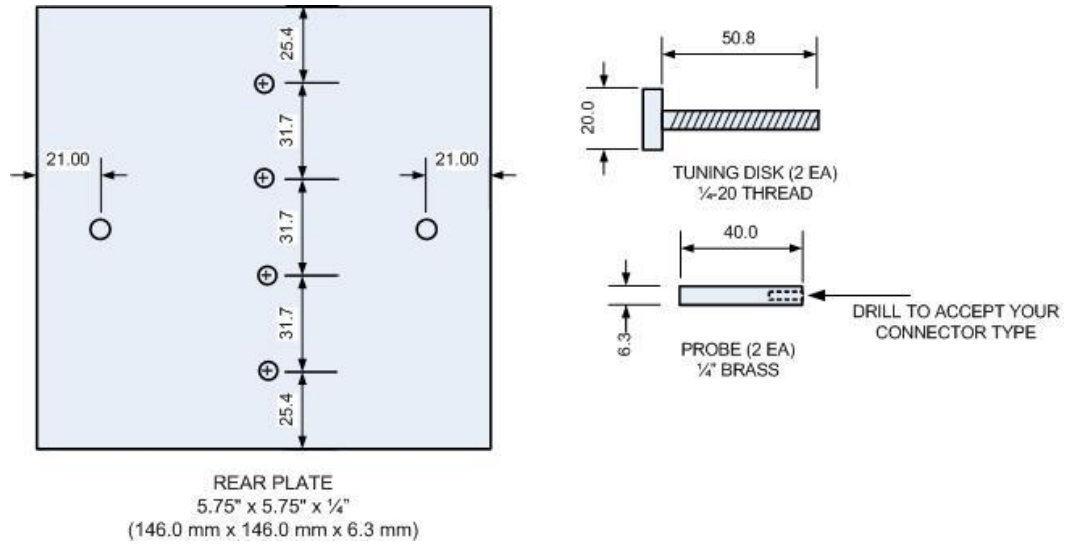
REAR PLATE, PROBES, TUNING DISK DIMENSIONS
